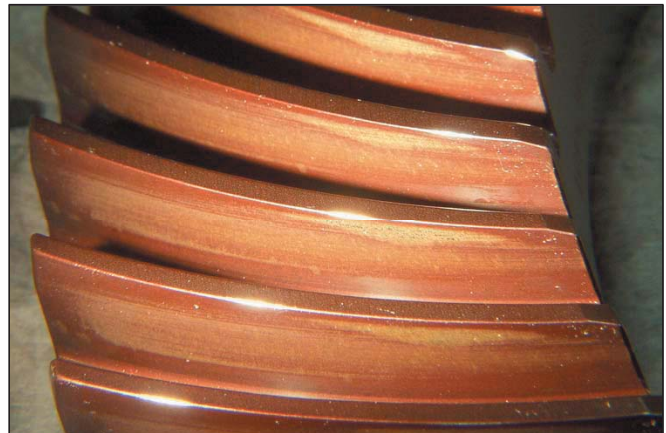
Spiral-bevel gear tooth contact after tests. Formated design.
